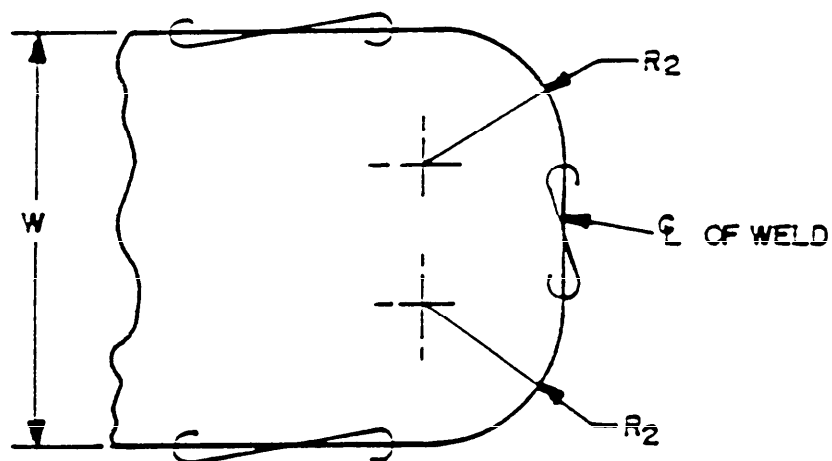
Locations of penetration attachment welds in relation to butts and seams.
